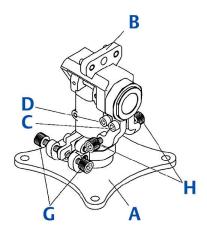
Mounting the tilt mount and detector using the lower mounting access
